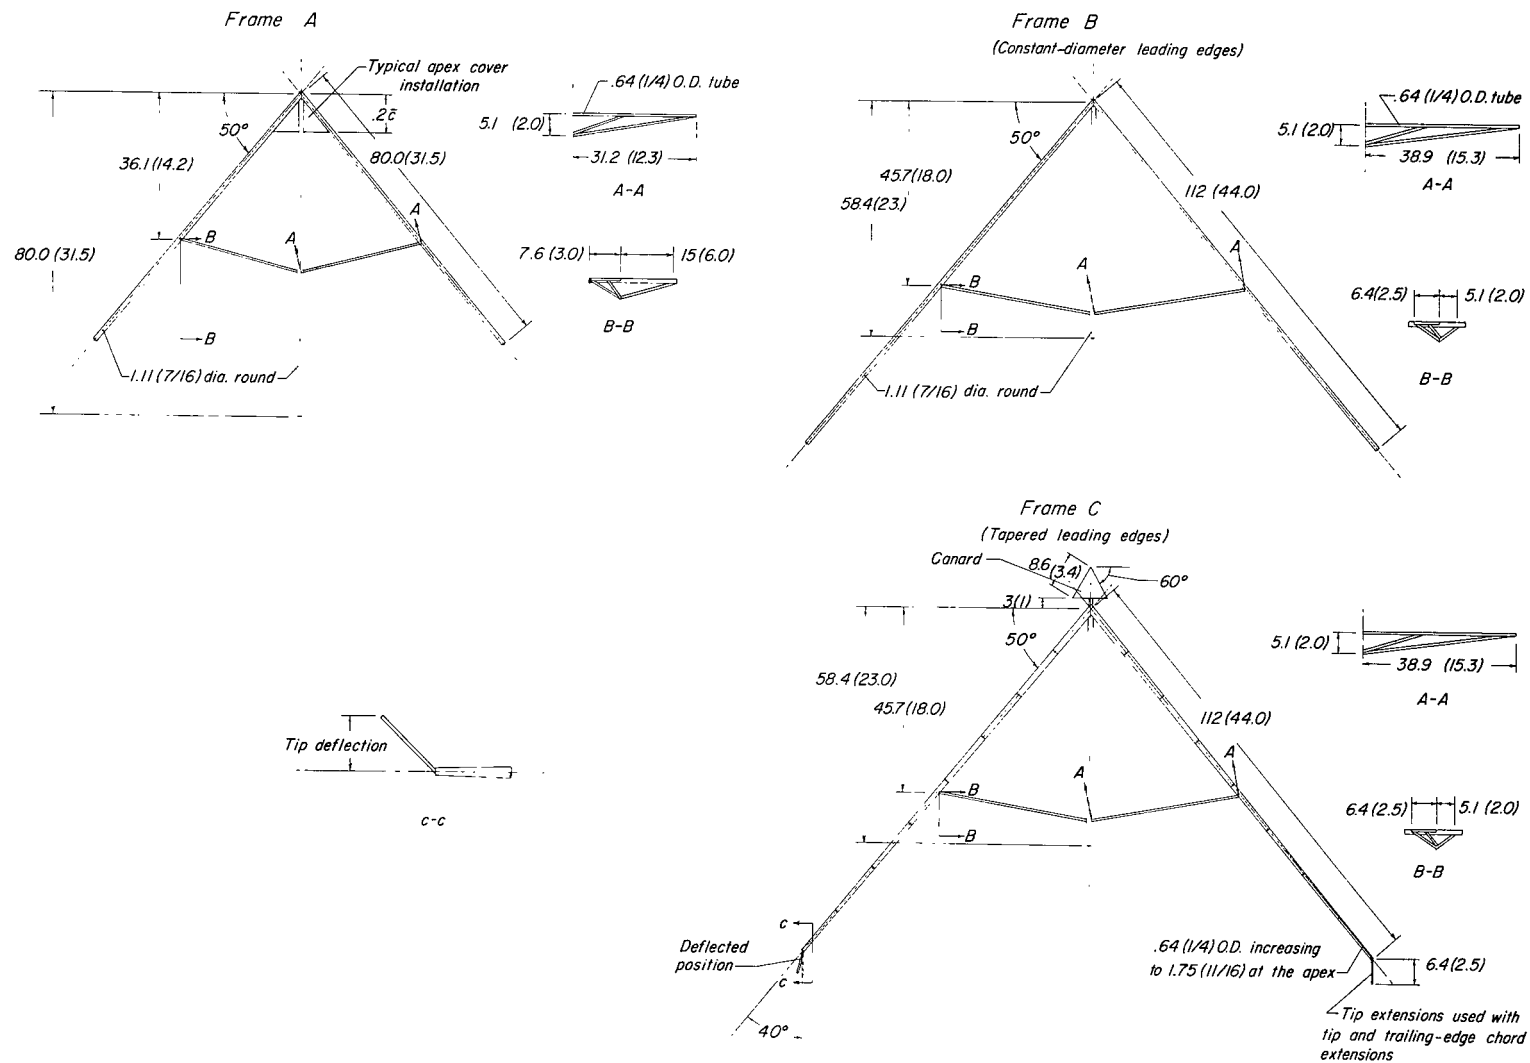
Details of wing frame construction. All dimensions in cm (in.) or as noted.
